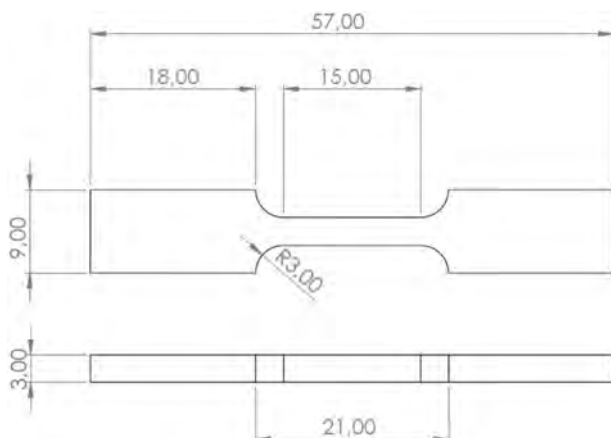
Specimen for tensile testing. Indicated dimensions in mm.
